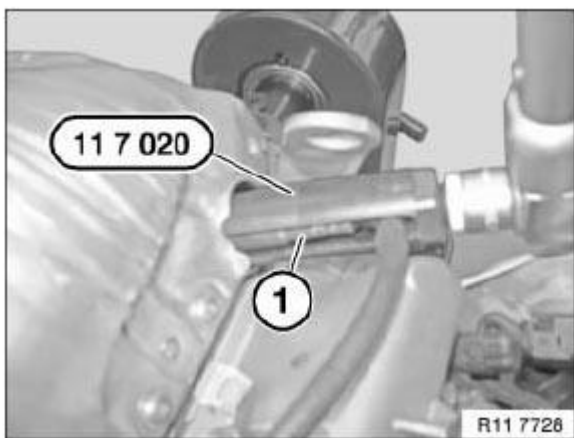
Removing Monitor Sensor With Special Tool (11 7 020)
